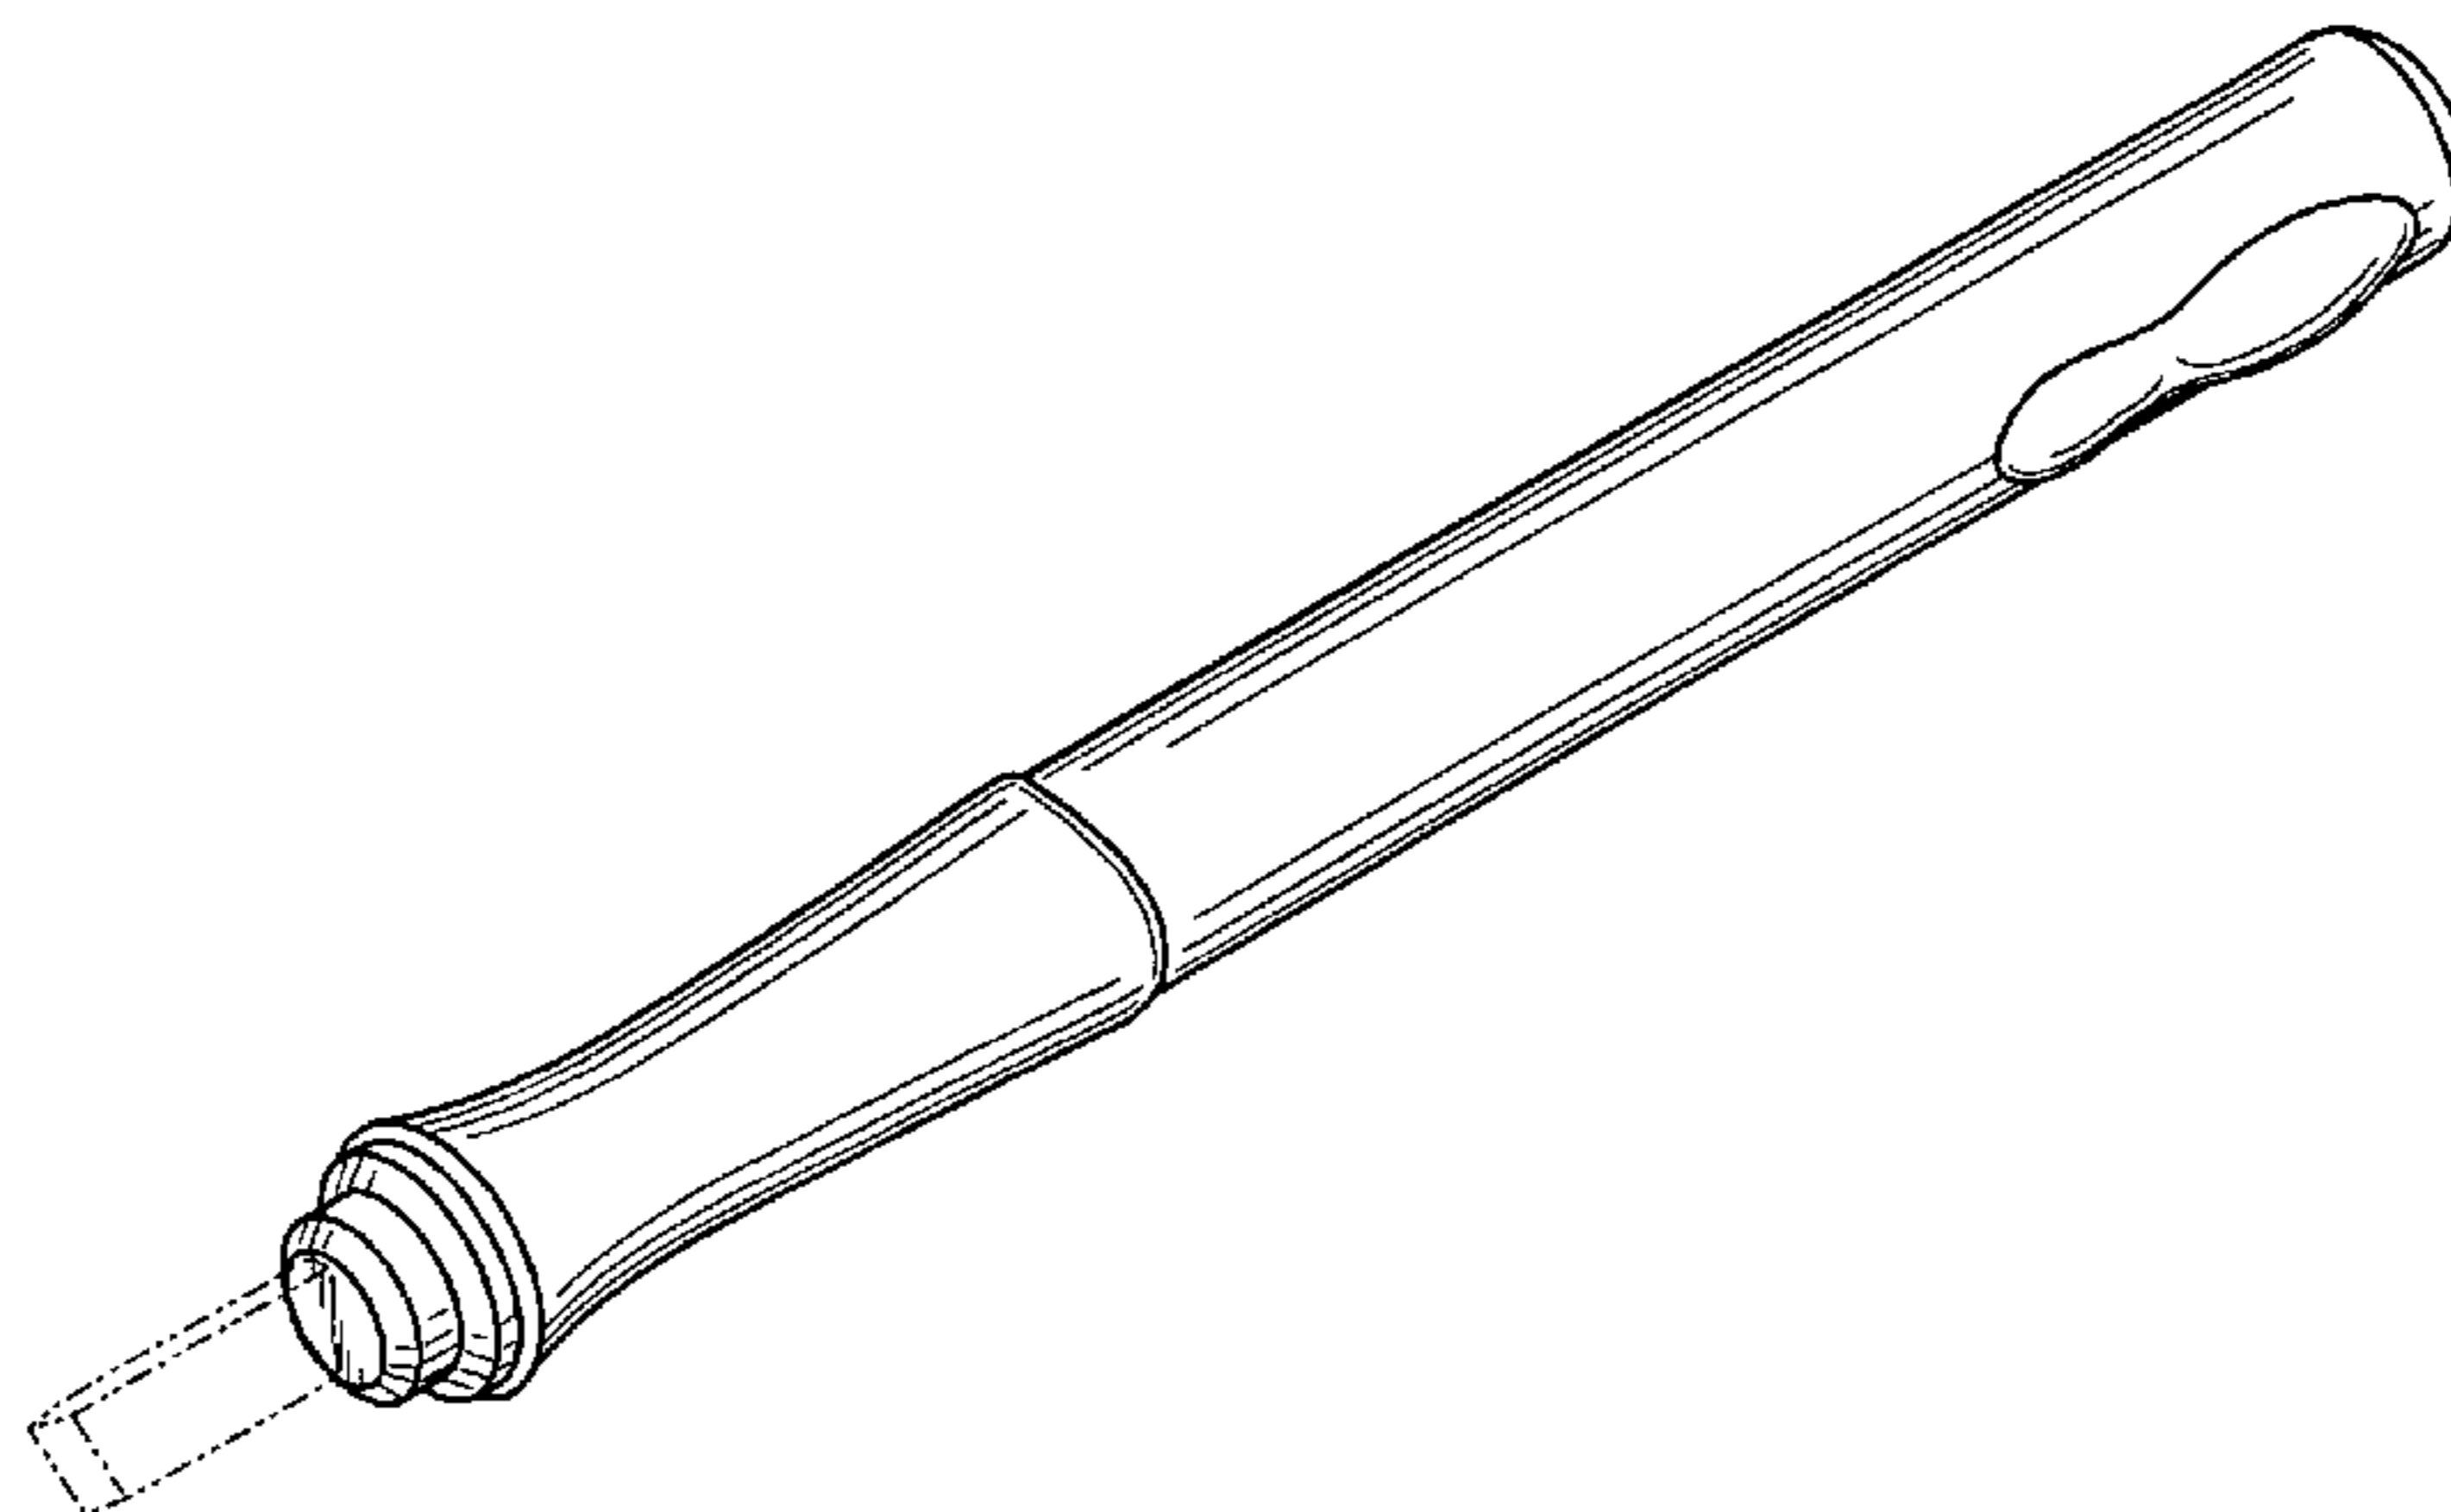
is a right side view of the tool handle with a spatula shown in broken lines;
